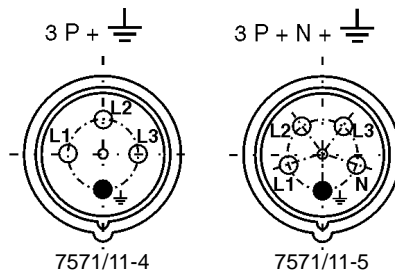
Arrangement of the contact sockets and terminal designations in the 6 o'clock position (view from the front side of the collar sockets onto the contact sockets)
